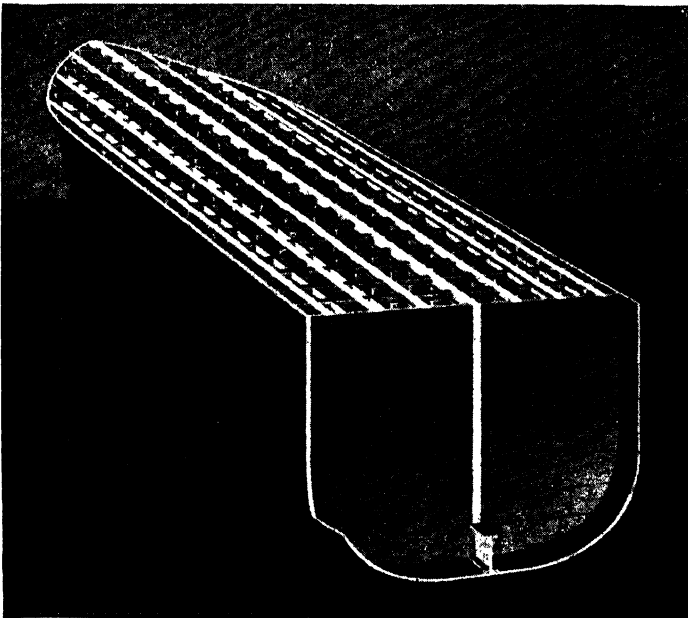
Deck beams, girders, and bulkheads ready for erecting deck plating.
